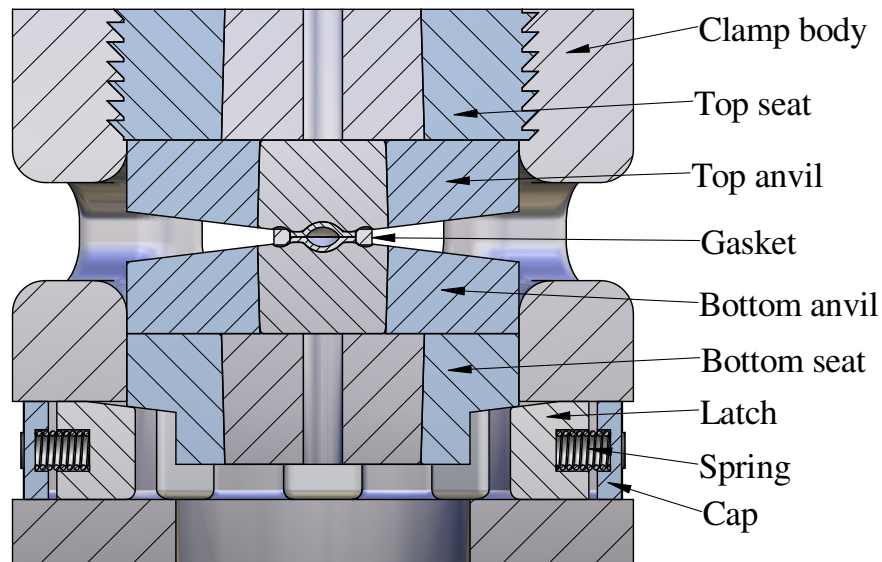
Cross-sectional view of the assembly of the clamp with latches, seats, anvils and the gasket.
